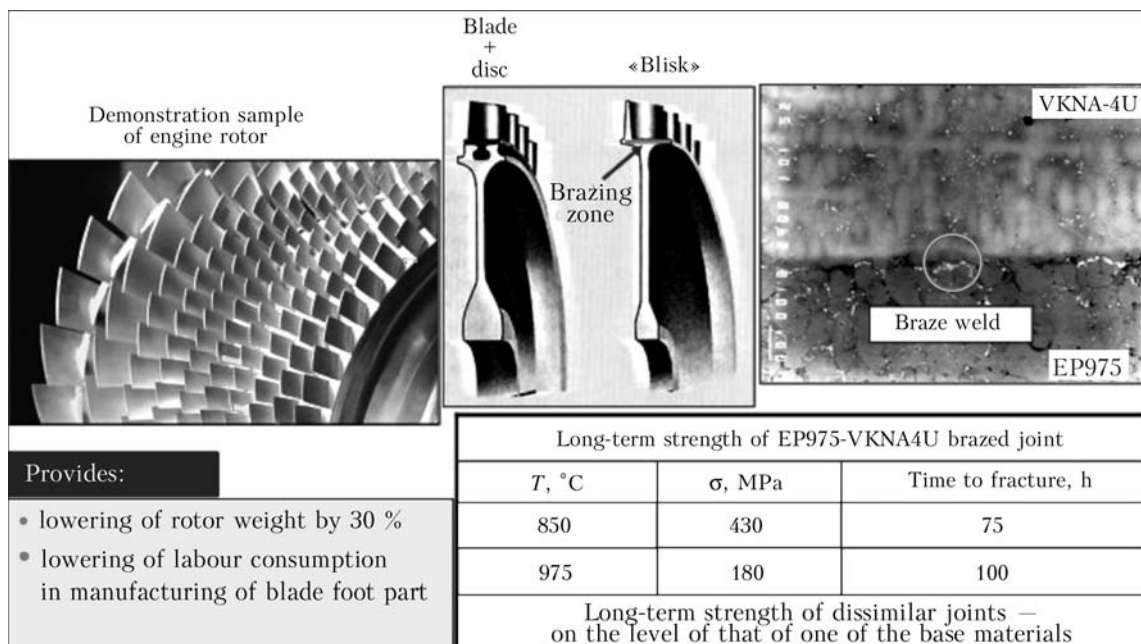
High-temperature brazing of HPT/LPT parts for manufacturing «blisk» type structures
